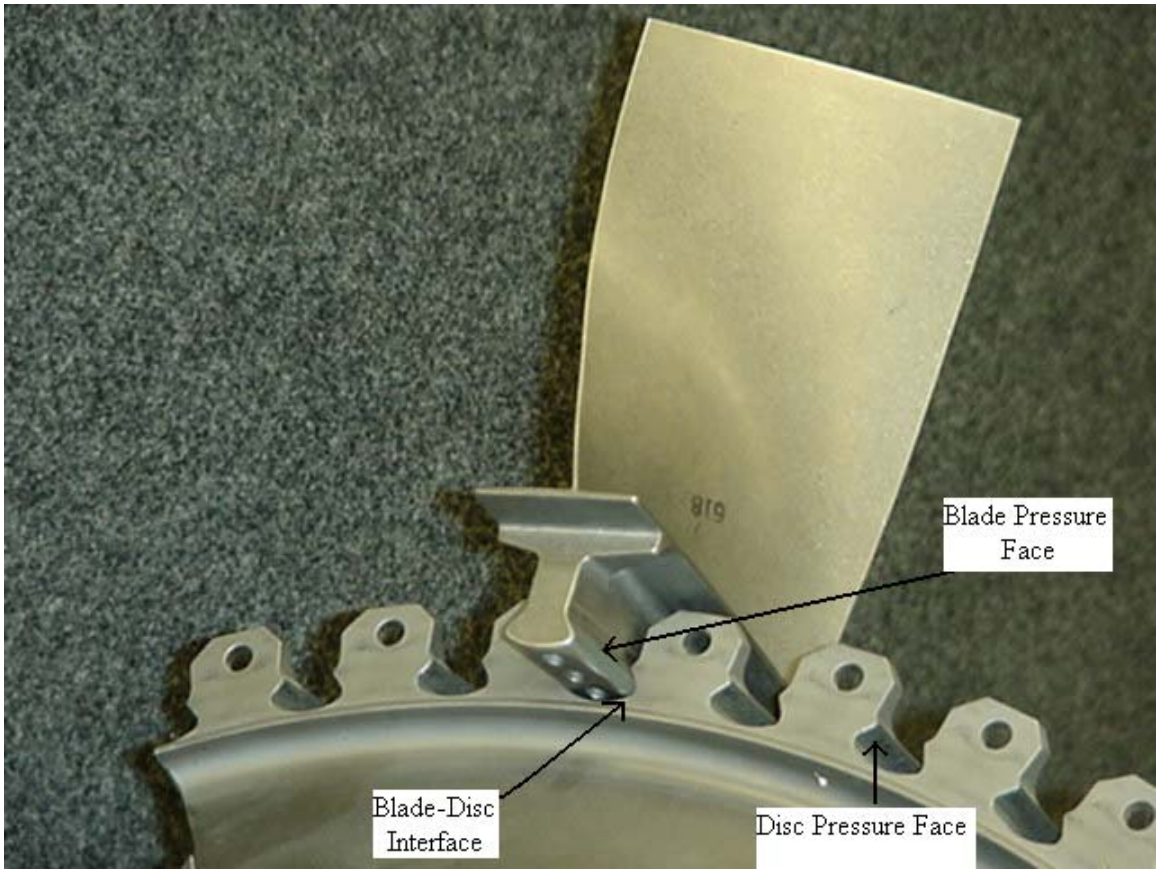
Blade/Disc Dovetail Joint in Turbine Engine.
